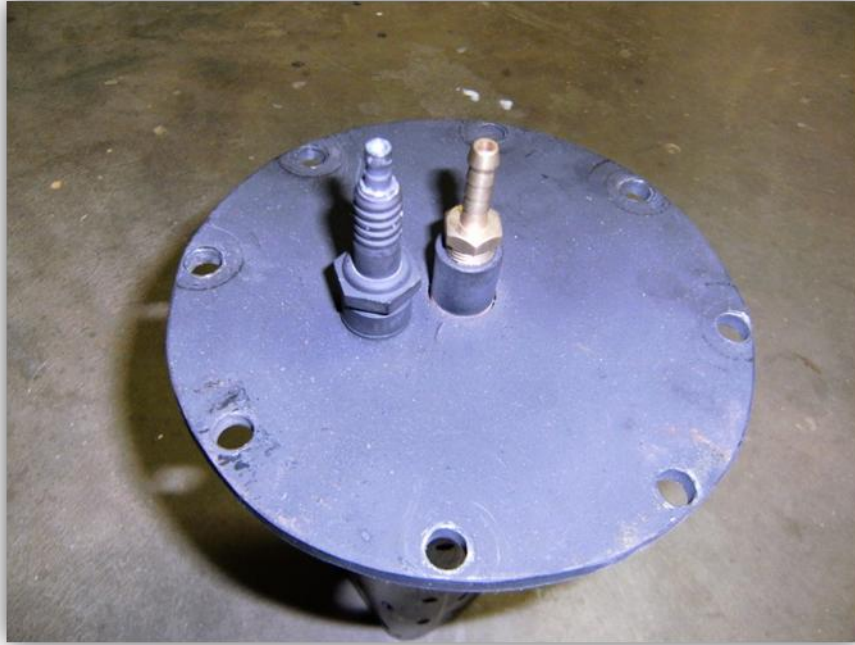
Top view of the completed combustion liner with fuel and spark inlet
